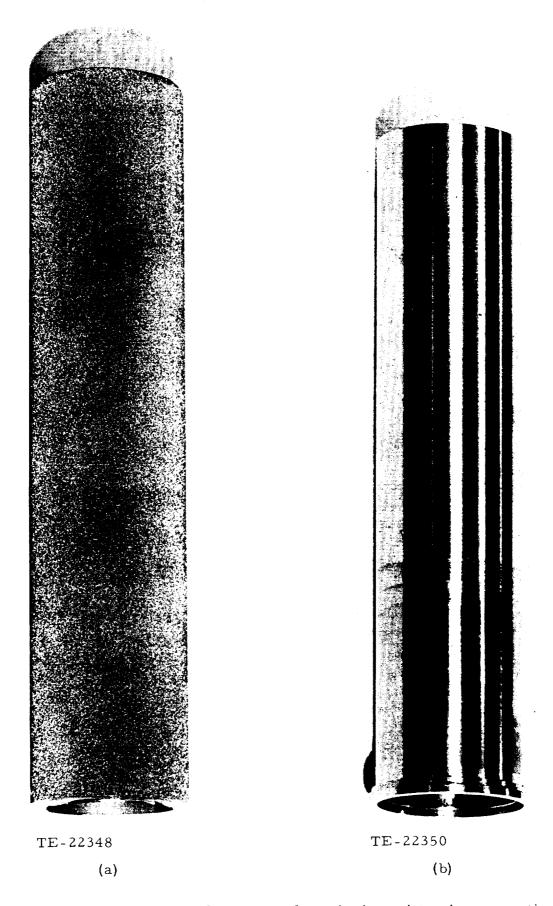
Vapor-deposited tungsten thermionic emitter incorporating a tungsten-to-tantalum diffusion bond: (a) tungsten blank; (b) machined emitter after bonding to tantalum stem
